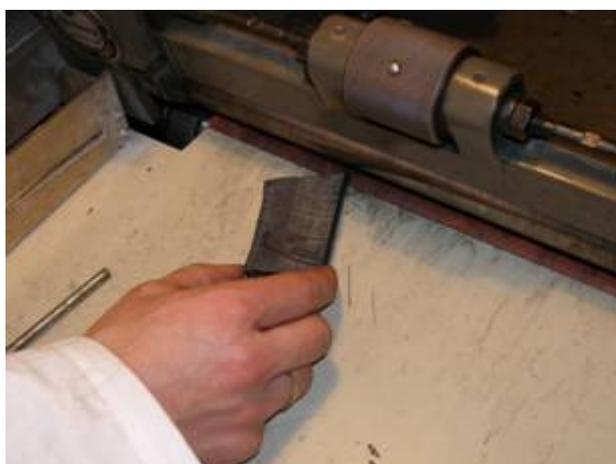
Sub-step 2A: Upper part of sidewall assembly being sectioned with the sectioning machine to obtain a clean sample of the sidewall
